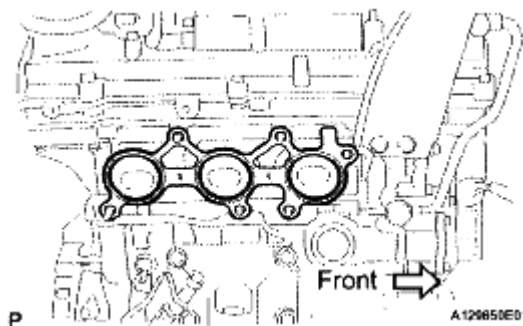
Locating Exhaust Manifold Sub-Assembly RH
